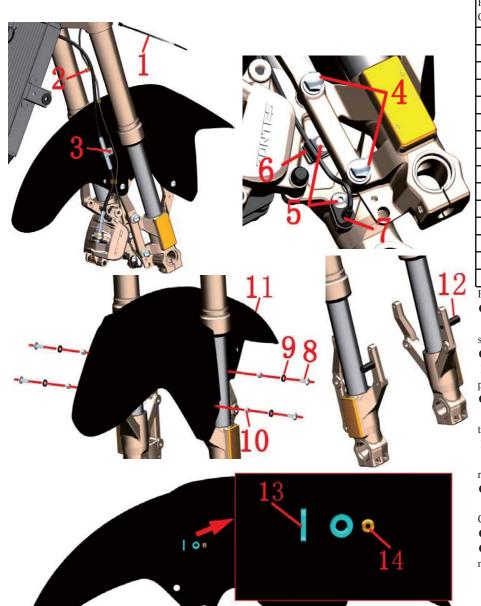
FR	ONT FORK	Front mudguard & wheel speed sensor component	СНК
